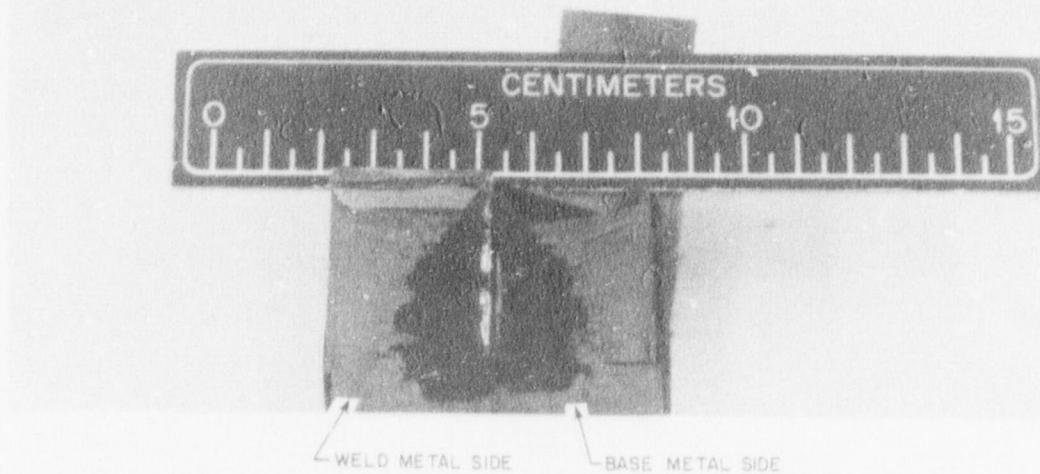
V-7B fracture surfaces in slab C exposed by splitting the chilled slab.
